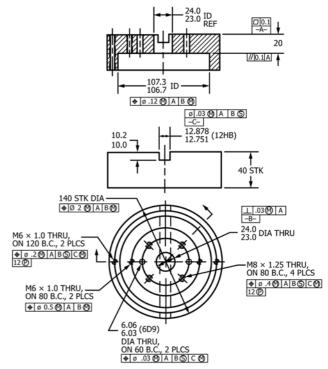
The Outer Shell of the Compression Fixture in Metric Units
